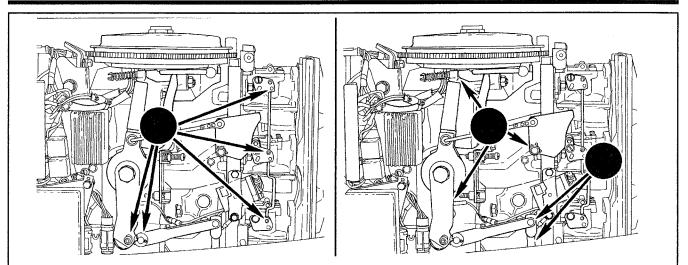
Carburetor linkage, cam roller, shift shaft and control shaft/lever bushing lubrication points for 25-70 hp (913cc) 3-cylinder, 2-stroke motors (except the 65RS, 65WR and some 50-70TTL models)
